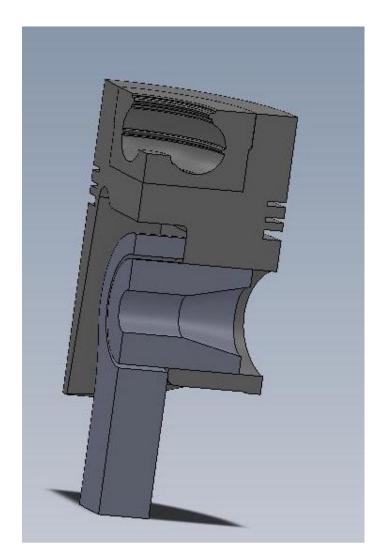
The 3-D model of the aluminum piston with cast-in steel combustion chamber, piston pin and connecting rod.
